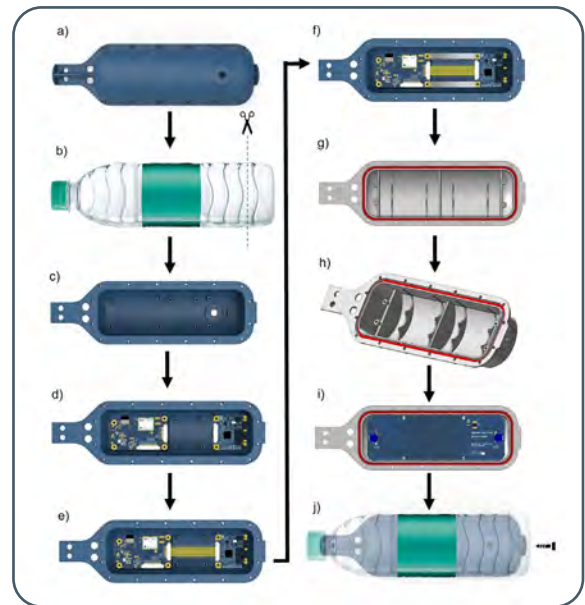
Bottle tag design and construction: a) Top view showing the shape and profile of the internal bottle insert's lid b) Side view of plastic water bottle showing the cut location c) Top view showing mounting hole locations d) Top-down view showing placement of Arribada Horizon GPS tracker board and ARGOS R2 transmitter inside the internal enclosure e) Top-down view showing cable assembly positioning f) Top-down view showing antenna ground plane extension tabs connecting the two PCBs together g) Top down view of base showing location of o-ring seal h) Perspective view of base enclosure showing 6 x AA battery insert positions i) Top-down view showing placement of battery board in the base of the enclosure j) Side view of plastic water bottle showing internal insert positioned inside. The ARGOS antenna is not shown.
